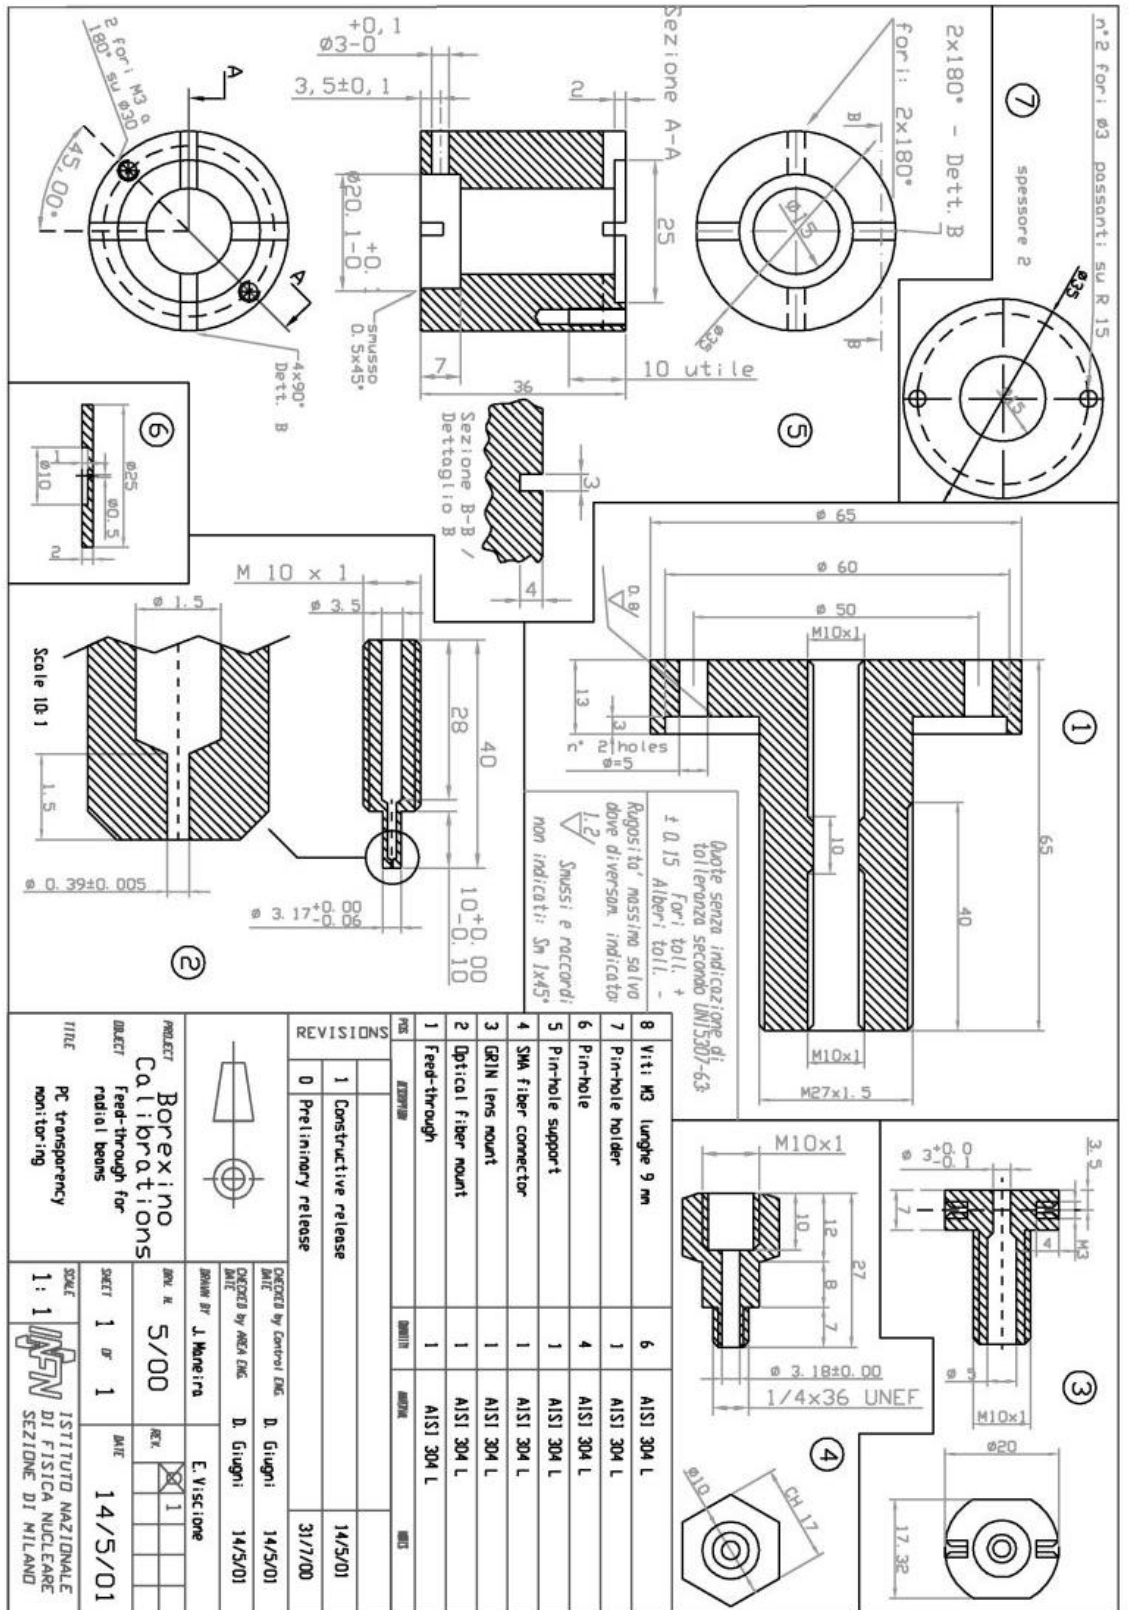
Technical drawing of the SSS feedthrough for the PMT calibration system.
